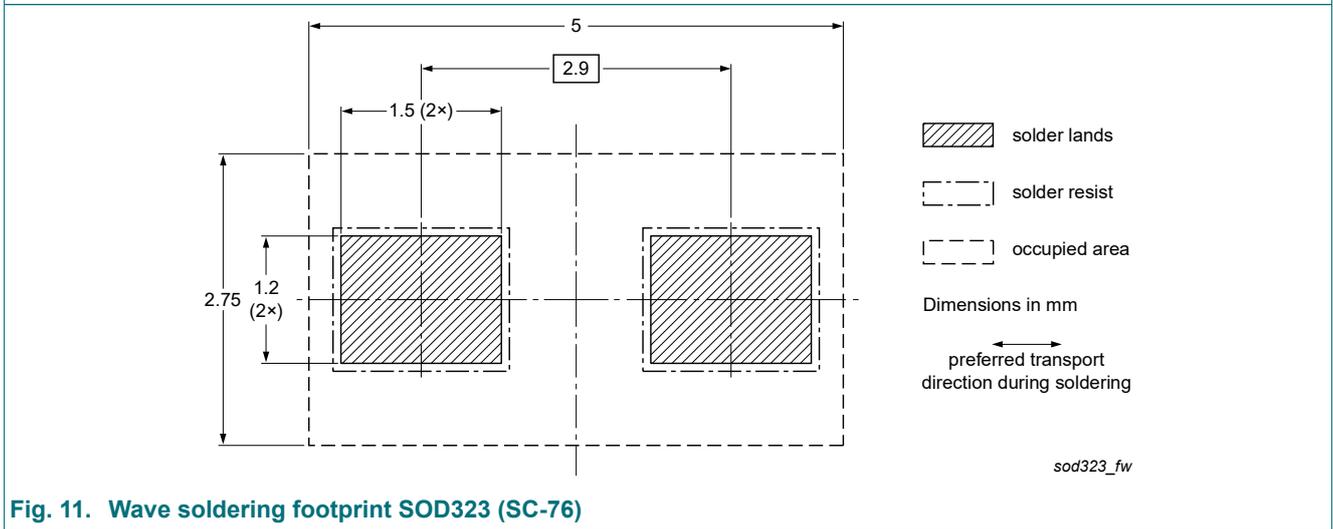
Wave soldering footprint SOD323 (SC-76)
